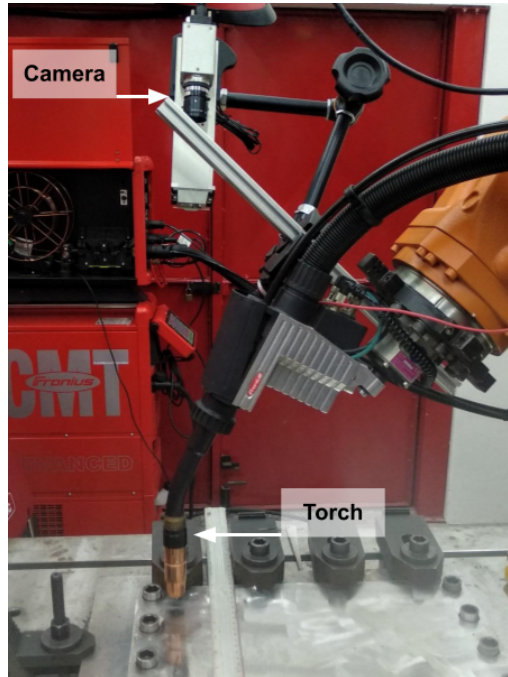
Xiris XVC-1000 camera and the welding torch assembly used in the second deposition setup.
